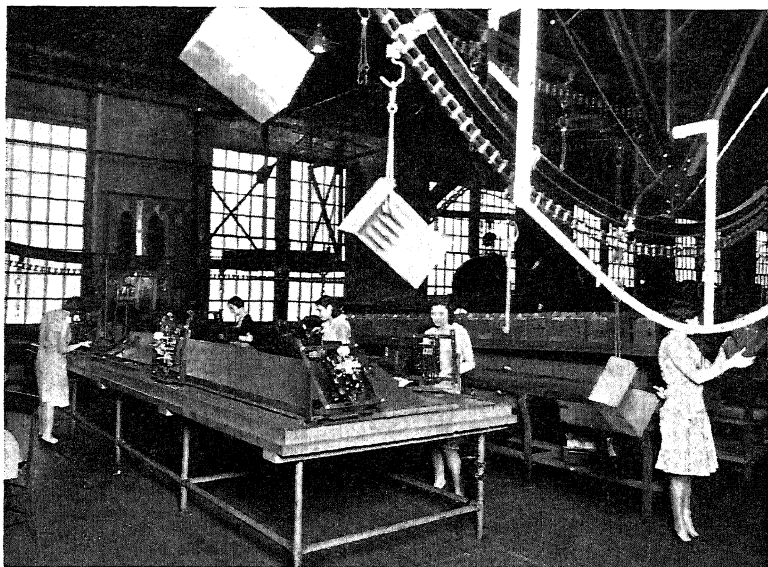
Progressive assembly line for five-horsepower cross-the-line starters.
